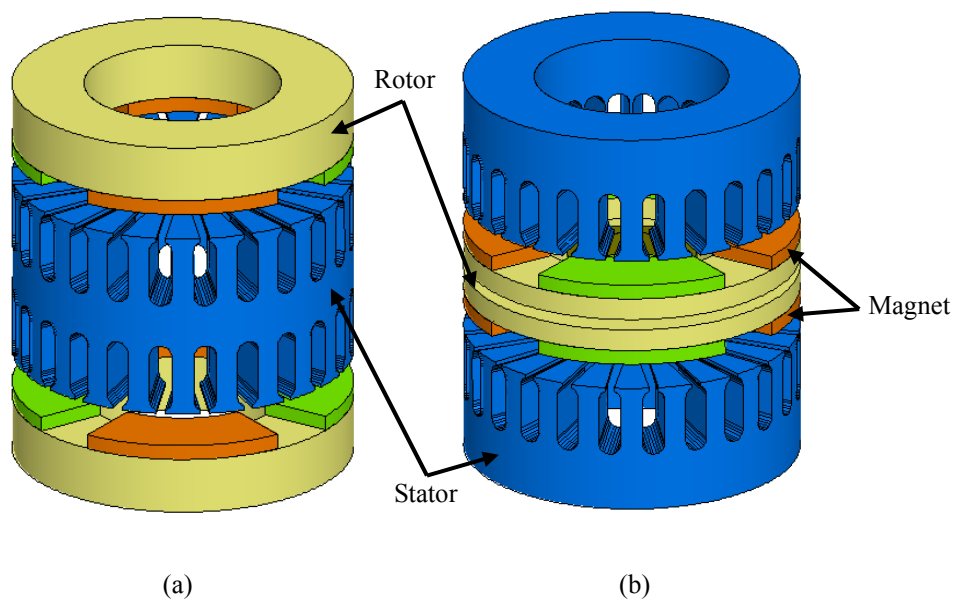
Double-sided AFPM machine (a) internal stator, (b) internal rotor
